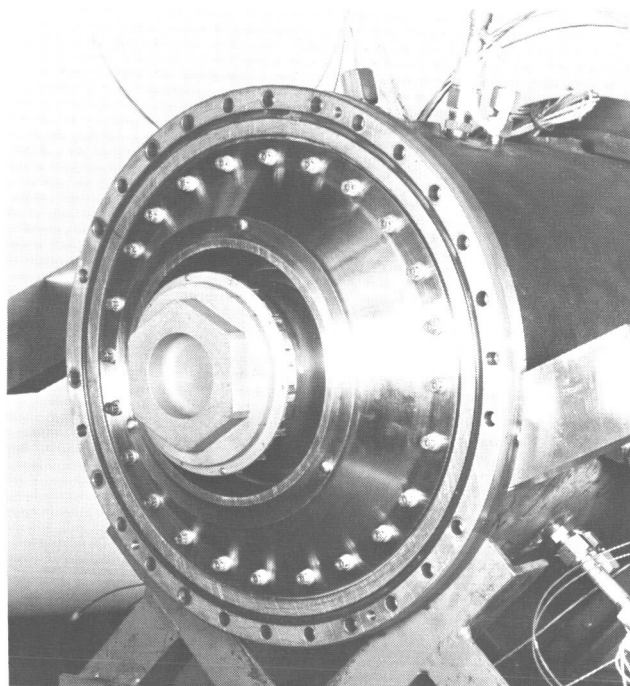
Mainshaft Seal Rig 29,360 - Front View of Rig With the Seal Assembly Installed XP-63731
